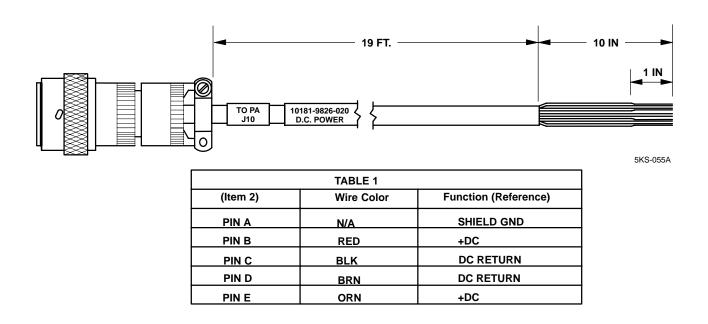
DC Power Cable Assembly (10181-9826-020)
